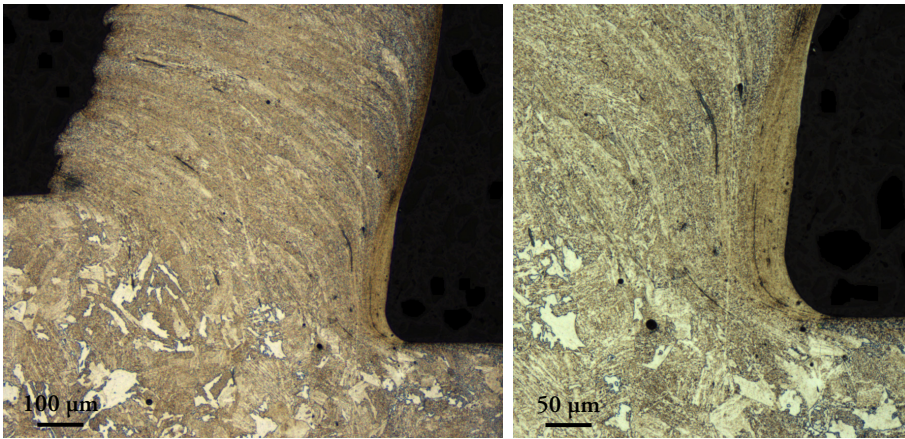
Workpiece material flow close to the tool edge radius while orthogonally turning AISI 1045.
